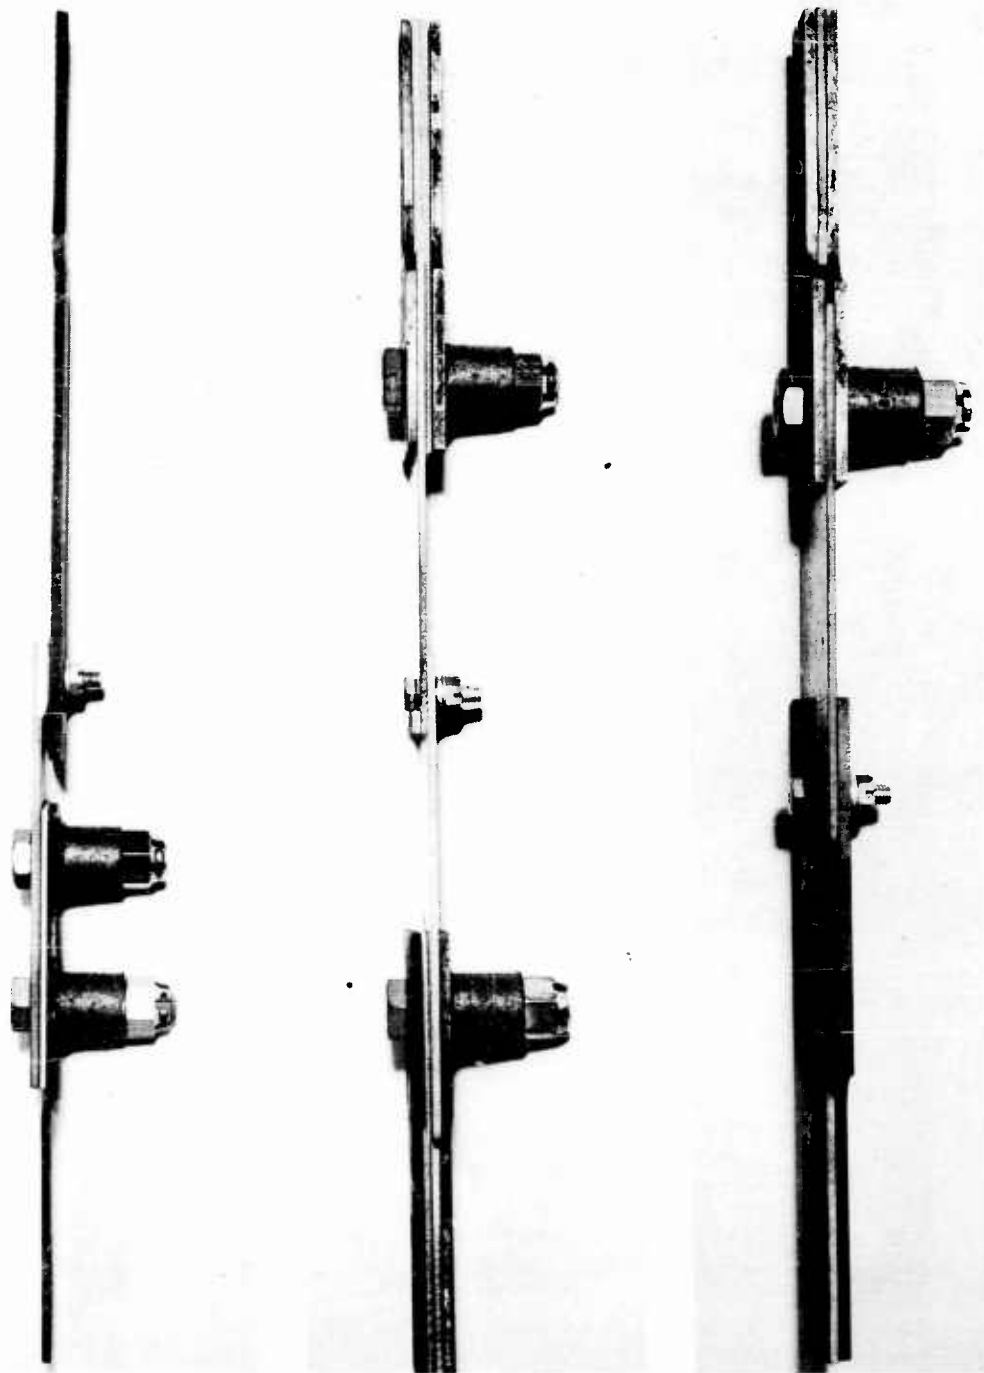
TEST ARRANGEMENT FOR FASTENER TESTS
